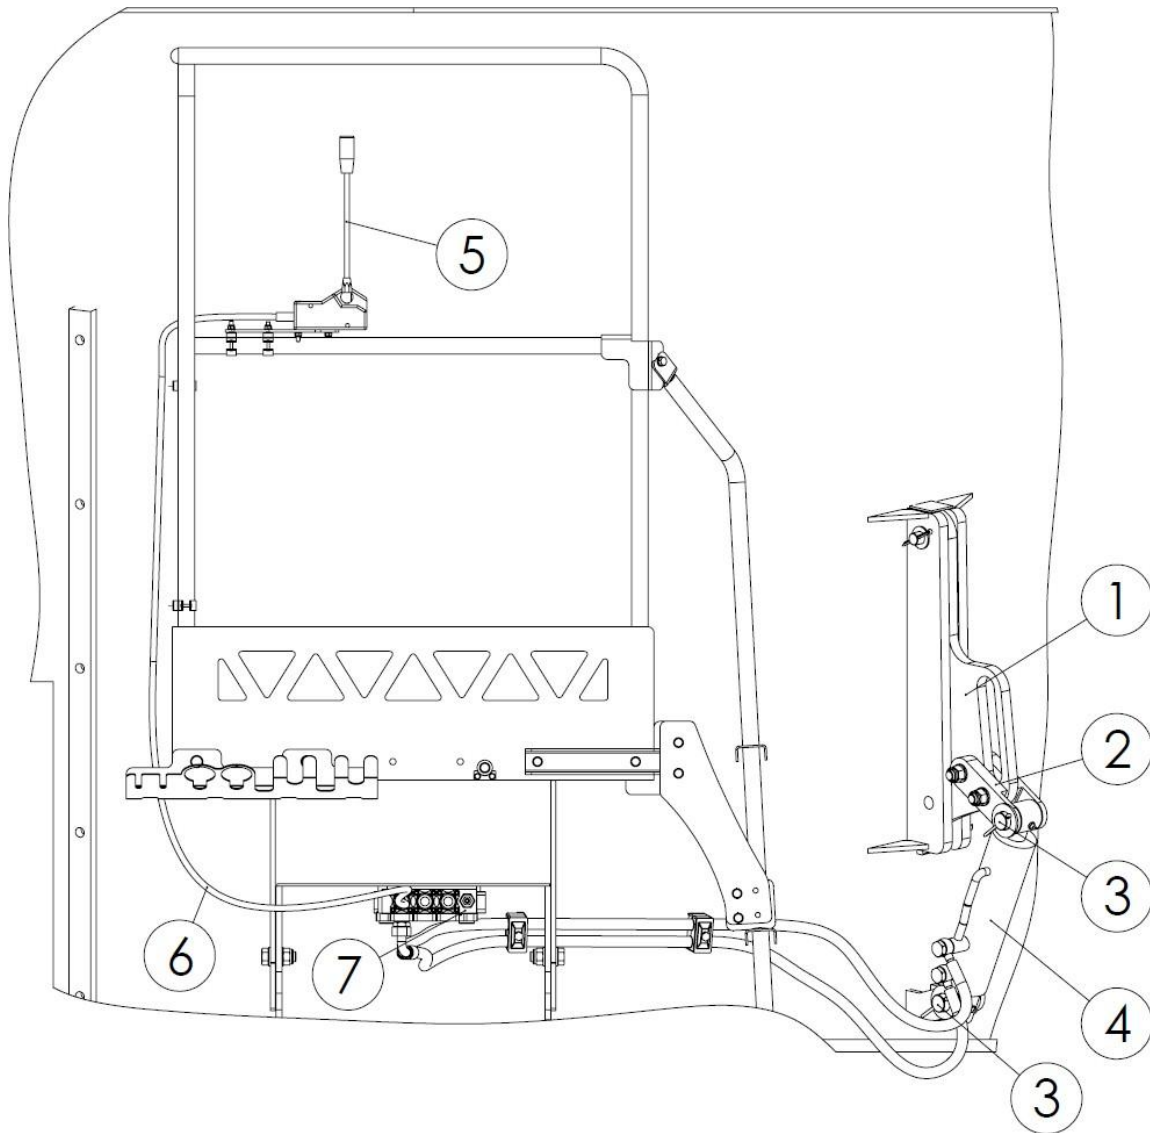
Hydraulic counterblade: 1 - counterblade, 2 - counterblade fastening, 3 - pin, 4 - hydraulic cylinder, 5 - counterblade control lever, 6 - control cable, 7 - hydraulic manifold
